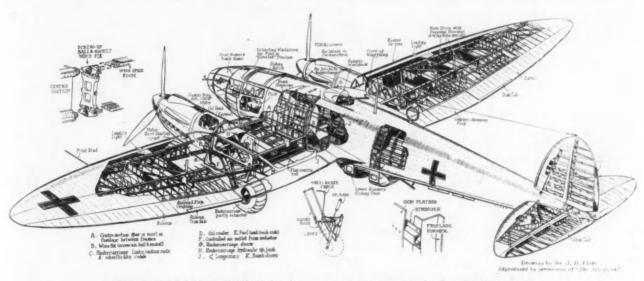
Heinkel He.IIIK Mk. V. bomber equipped with two Daimler-Benz DB-601A engines
